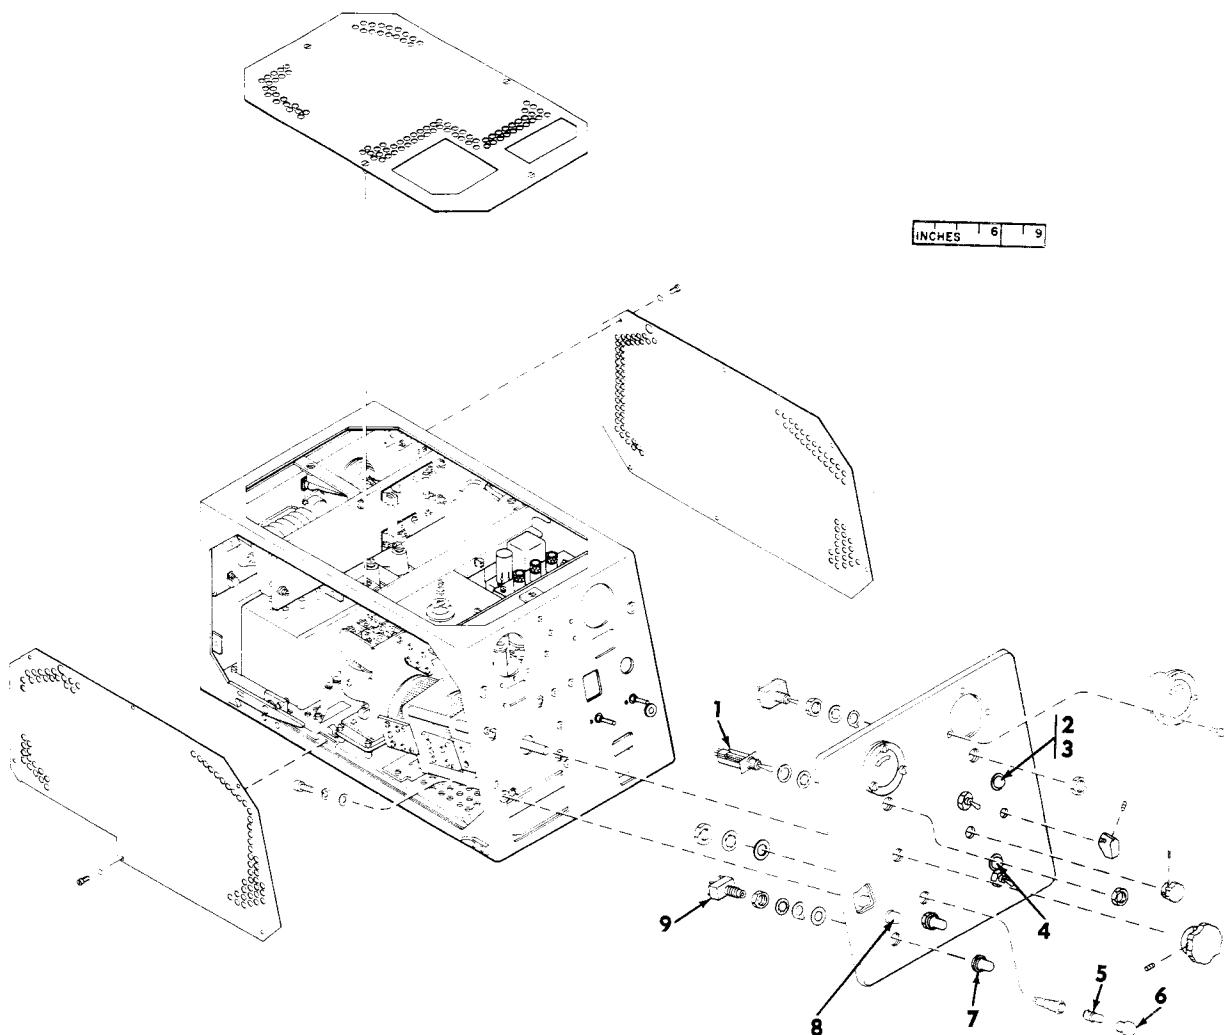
Control, antenna C-1469/M (7621540)—exploded view
